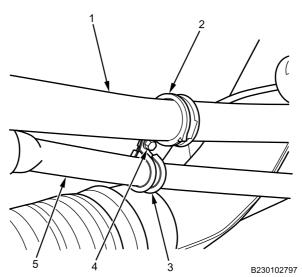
Oil Gauge Tube and Transmission Dipstick Retainer.
